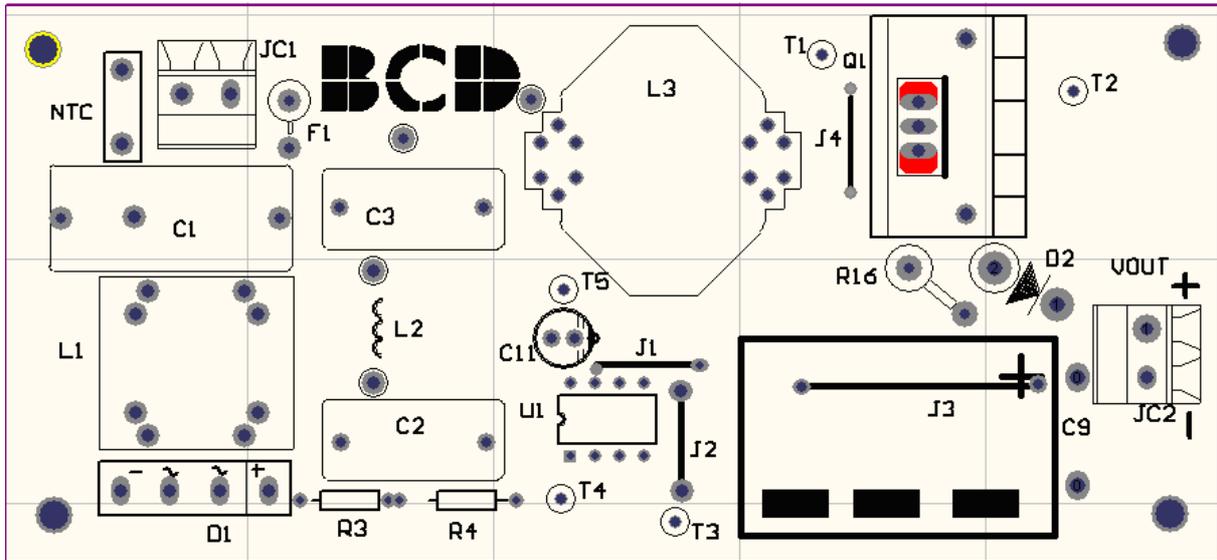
Demo Board PCB and Component Layout (Top View, 125mm×56mm)
